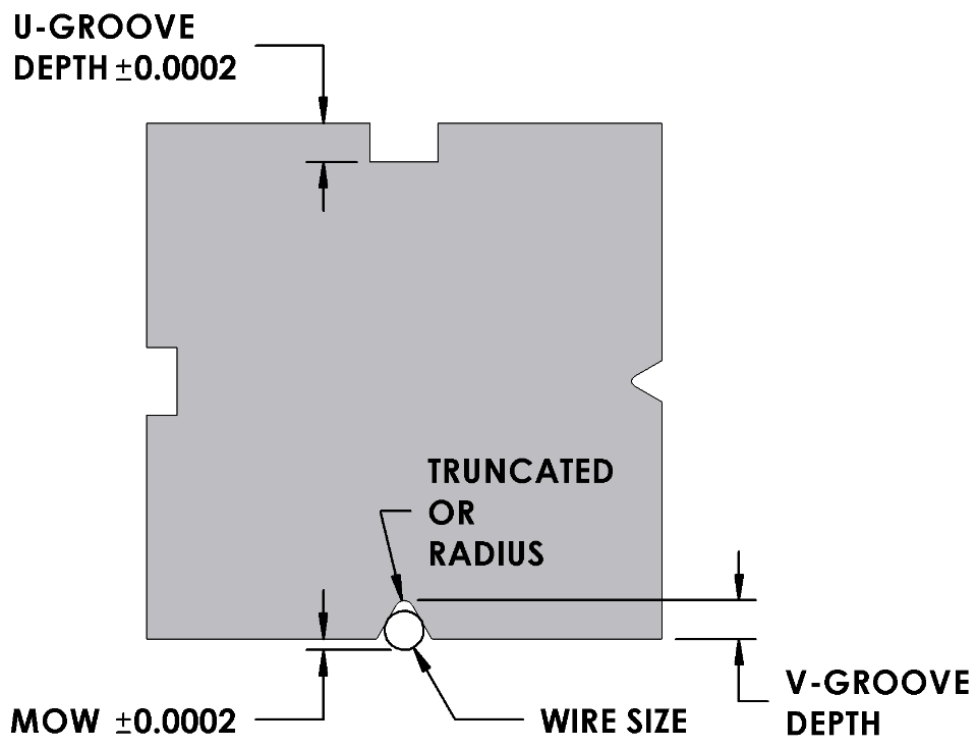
Round Thread Height Gauge Setting Standard (Thread Addendum Gauge Setting Standard)
